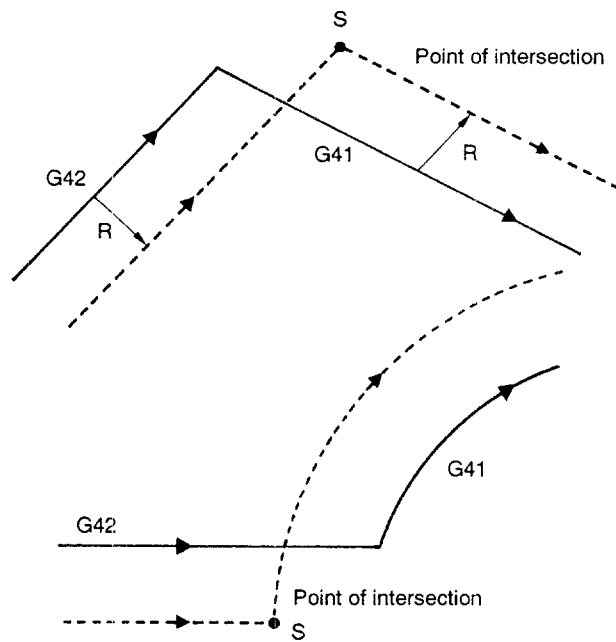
Switching of the Offset Direction at Point of Intersection of Offset Tool Paths
